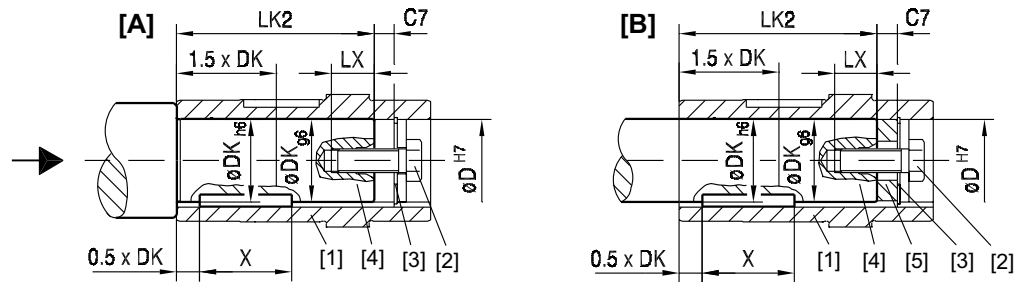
Customer shaft with contact shoulder (A) and without contact shoulder (B)
